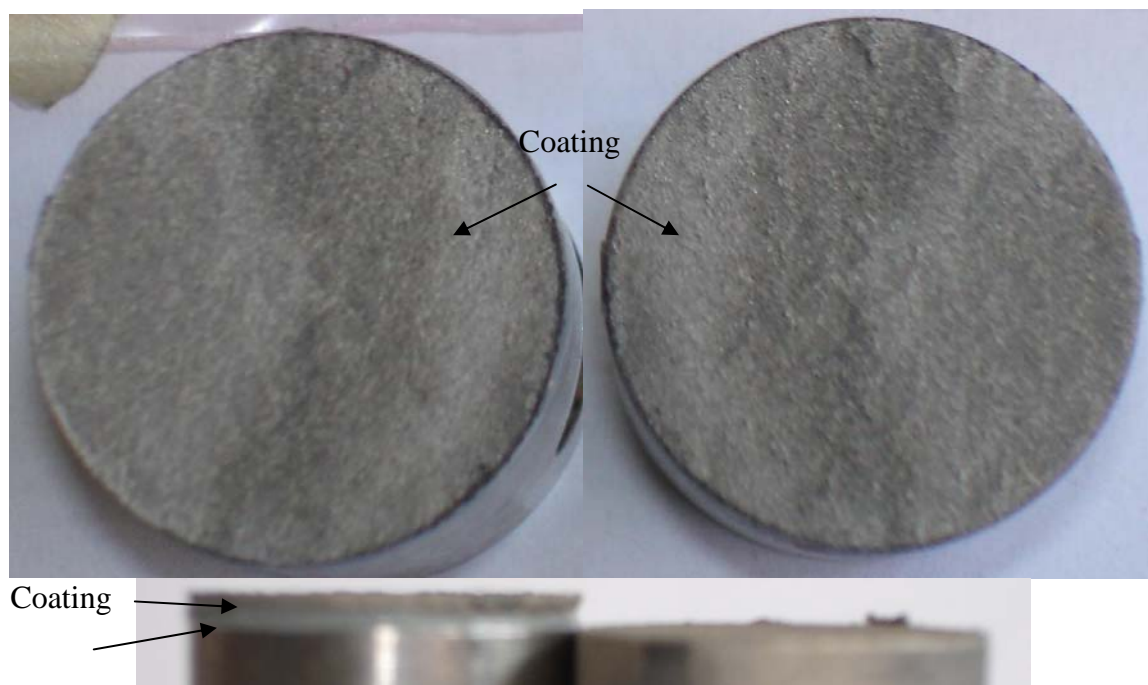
Top and side views of Ni-30 wt. % Ni coated BN (75 μm) coating surface after fracture showing adhesive failure at coating-substrate interface
